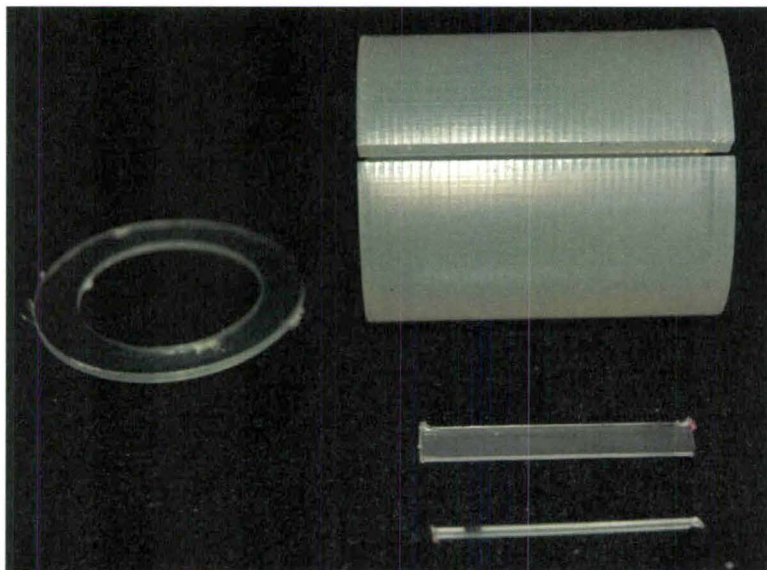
A photograph showing specimens cut out from extruded tube parallel and perpendicular to the extrusion direction.
